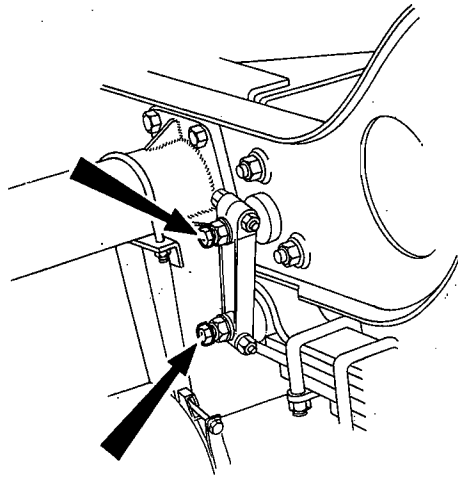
FRONT AND REAR SHACKLE PIN-LUBRICATORS
